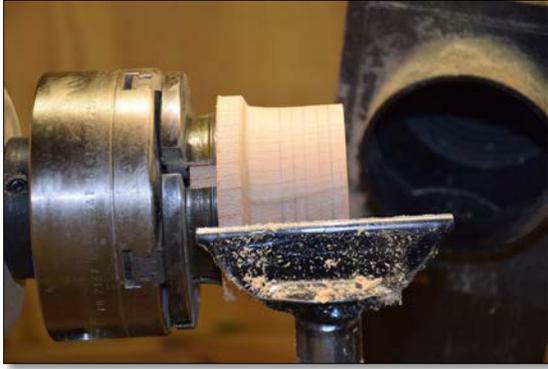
View showing cylinder with pencil markings where the edges will be outlined.
